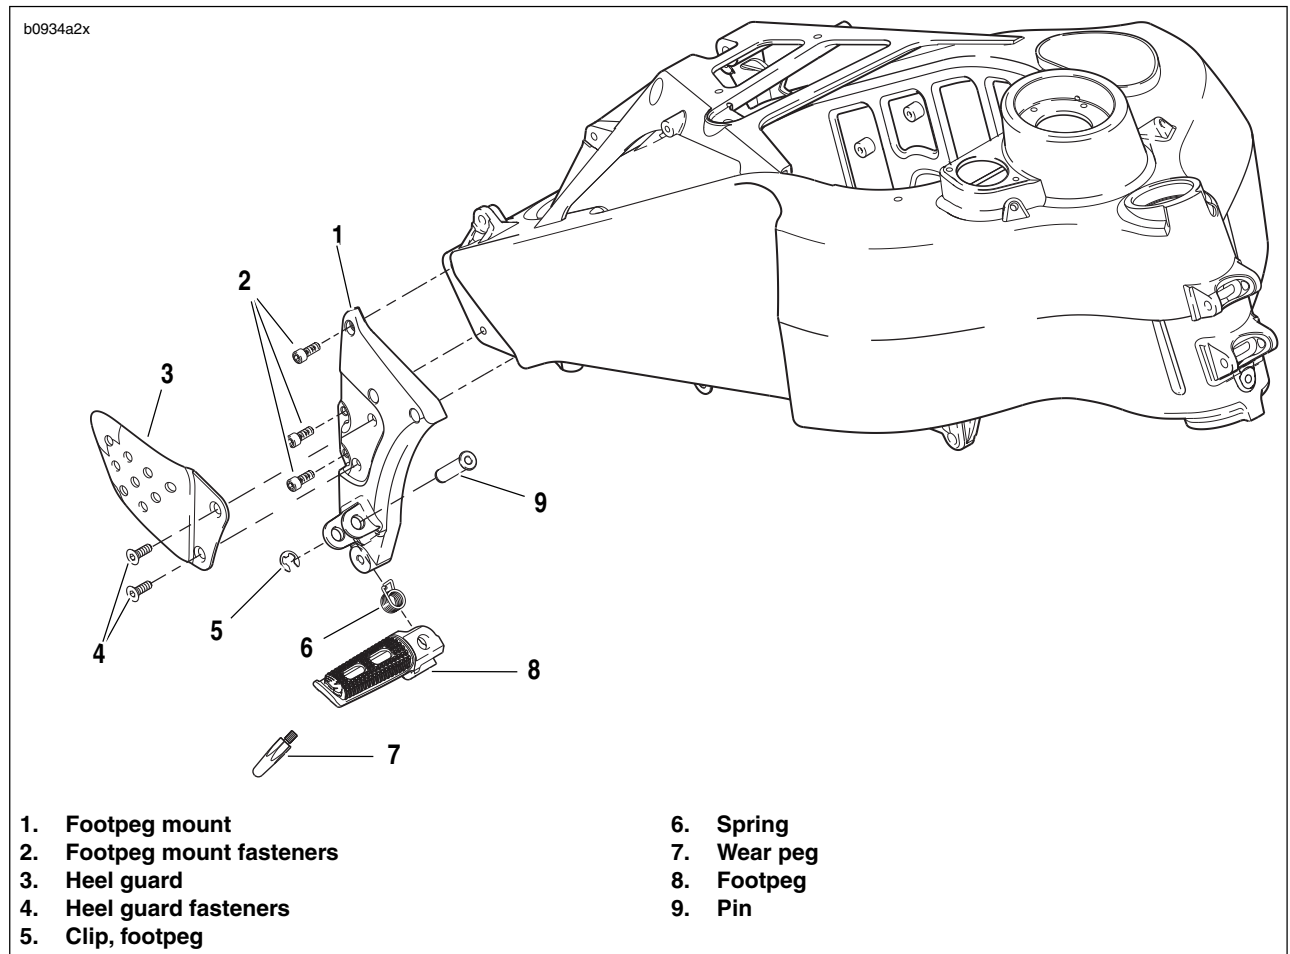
Rider Footpeg, Mount and Heel Guard Assembly
